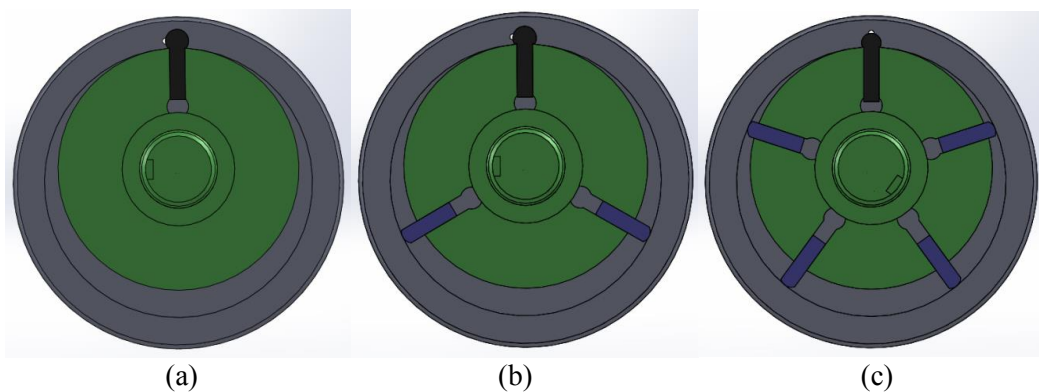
Three different designs of RSVR compressor (Single (a), three (b) and five-vane (c))
